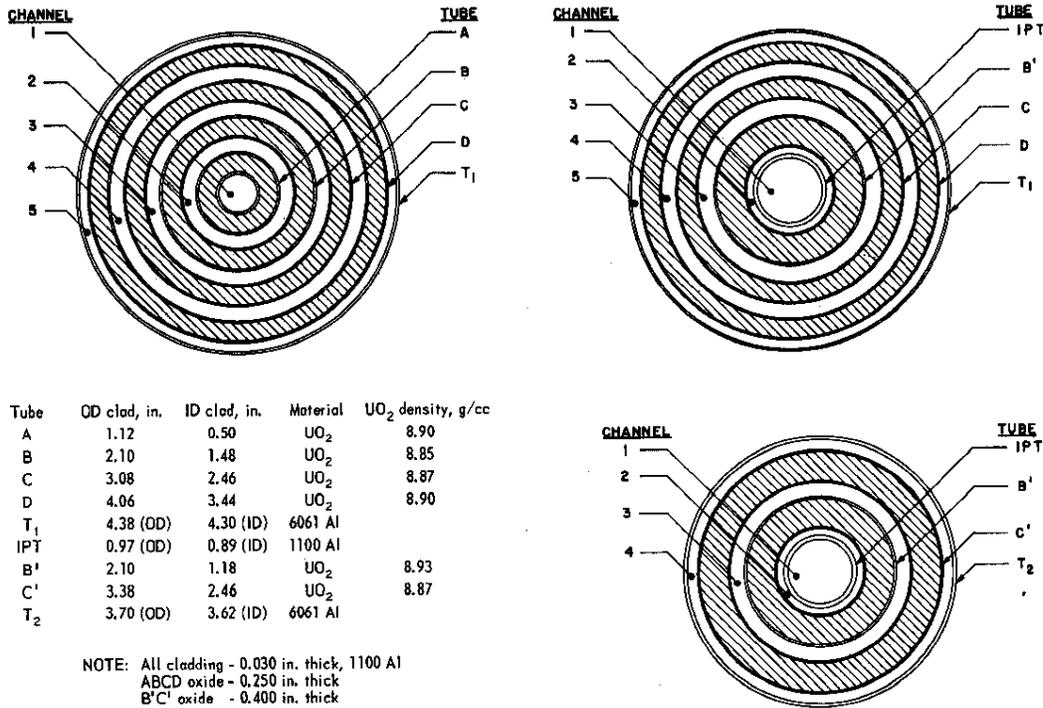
CROSS SECTIONS OF TEST FUEL ASSEMBLIES
